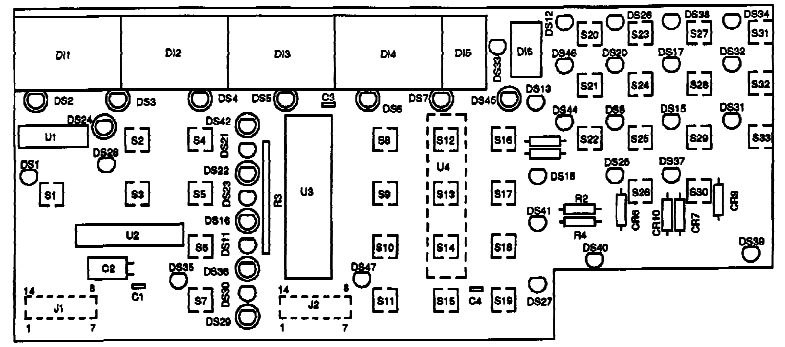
A1 Motherboard Circuit Card Assembly Component Locator, and Schematic Diagram (Sheet 3 of 3).
